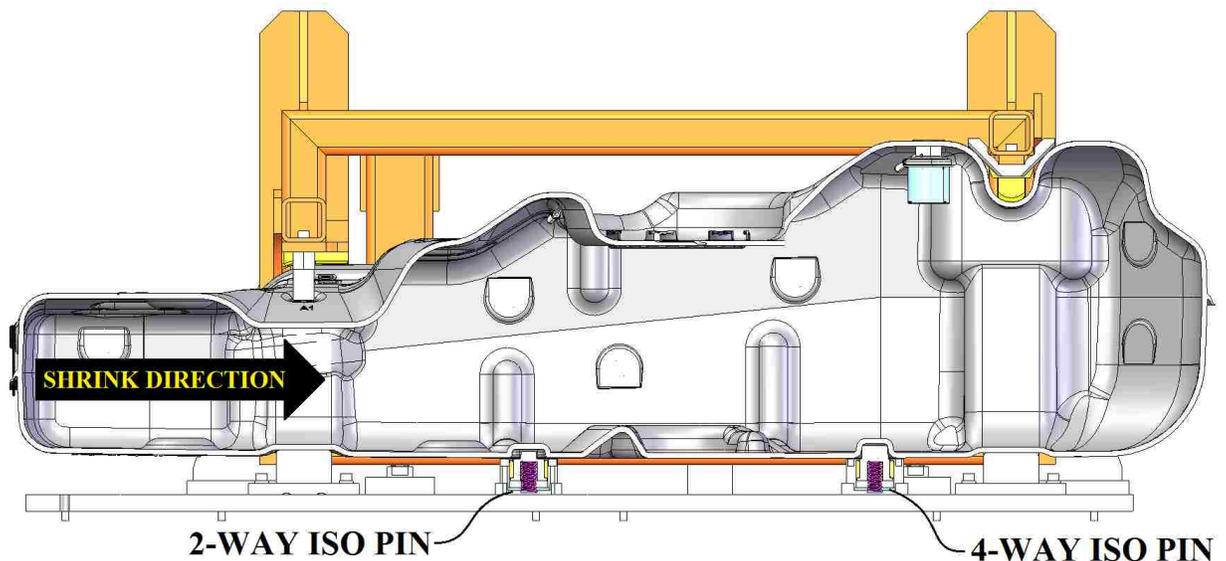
Fuel Tank fixture Cross Section (Courtesy SPM Automation (Canada) Inc.)
